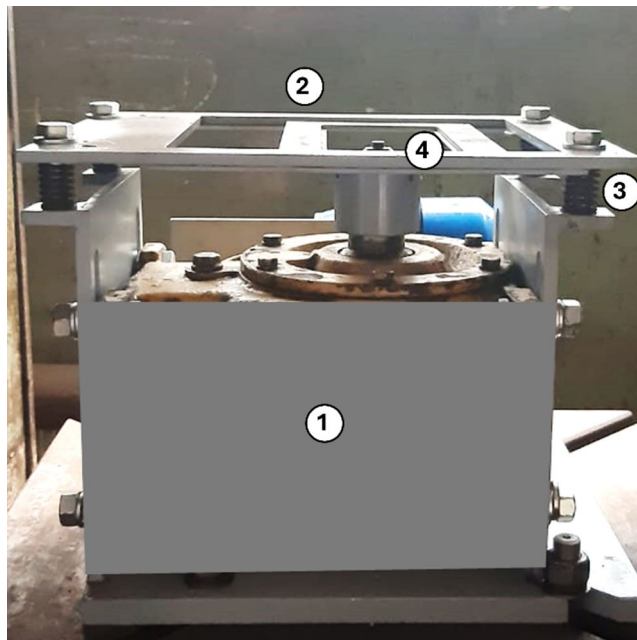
Photograph of the L-HPT toolset unit: (1) electric motor with a gearbox for the punch rotation, (2) frame for holding and positioning the workpiece, (3) spring-loaded guides, (4) rotating punch
